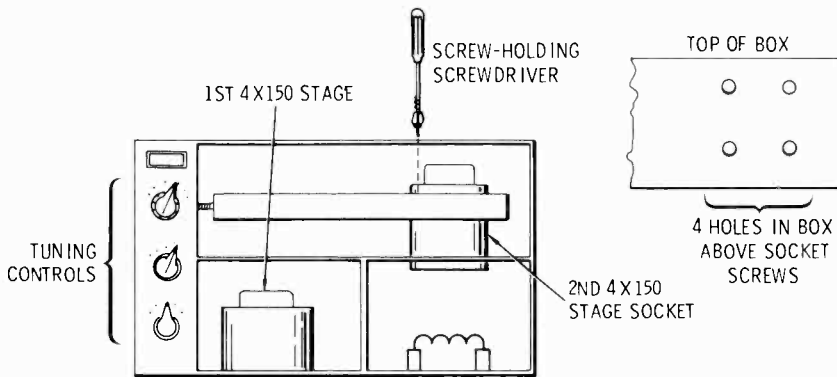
Cut holes in the top of the r-f box to ease socket disassembly and assembly.
